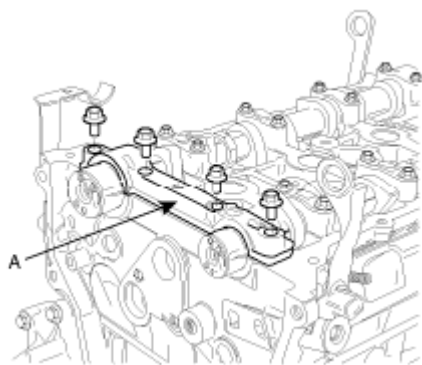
Identifying Front Cam Shaft Bearing Cap
